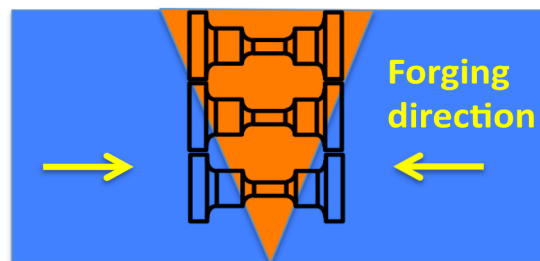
Orientation of tensile specimens cut from weldments.
